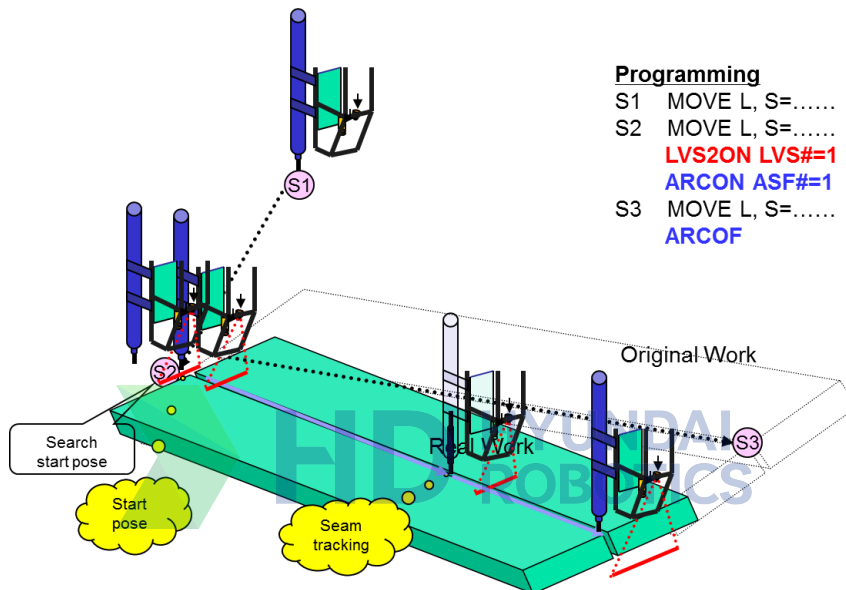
Example of the LVS welding line tracking in which the starting point search is used
